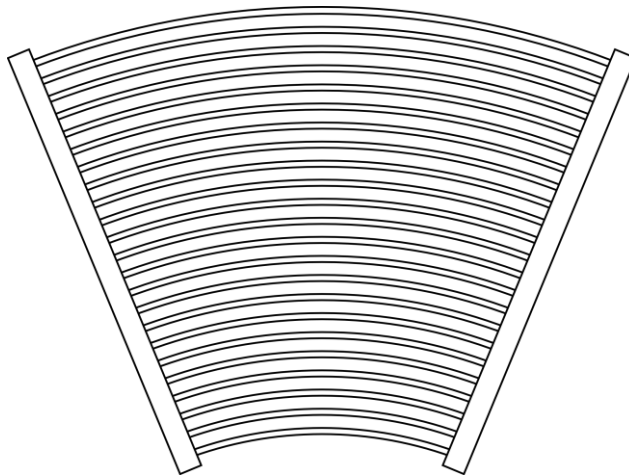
Cross-Sectional View of MURR LEU Fuel Element.
